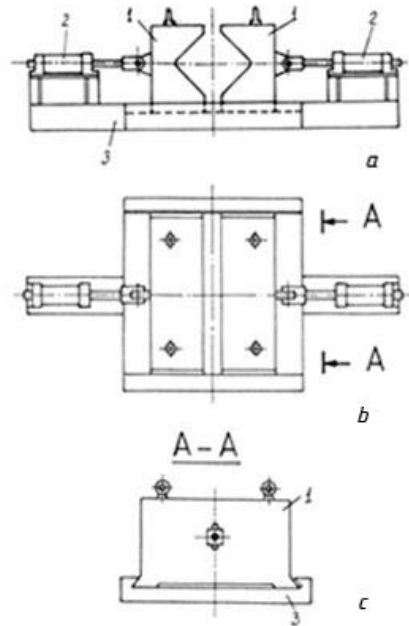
Guide wire of a cross-rolling mill: a – general view; b – top view; c – section A-A in Fig. 1b; 1 – figured slider; 2 – hydraulic drive; 3 – frame base
